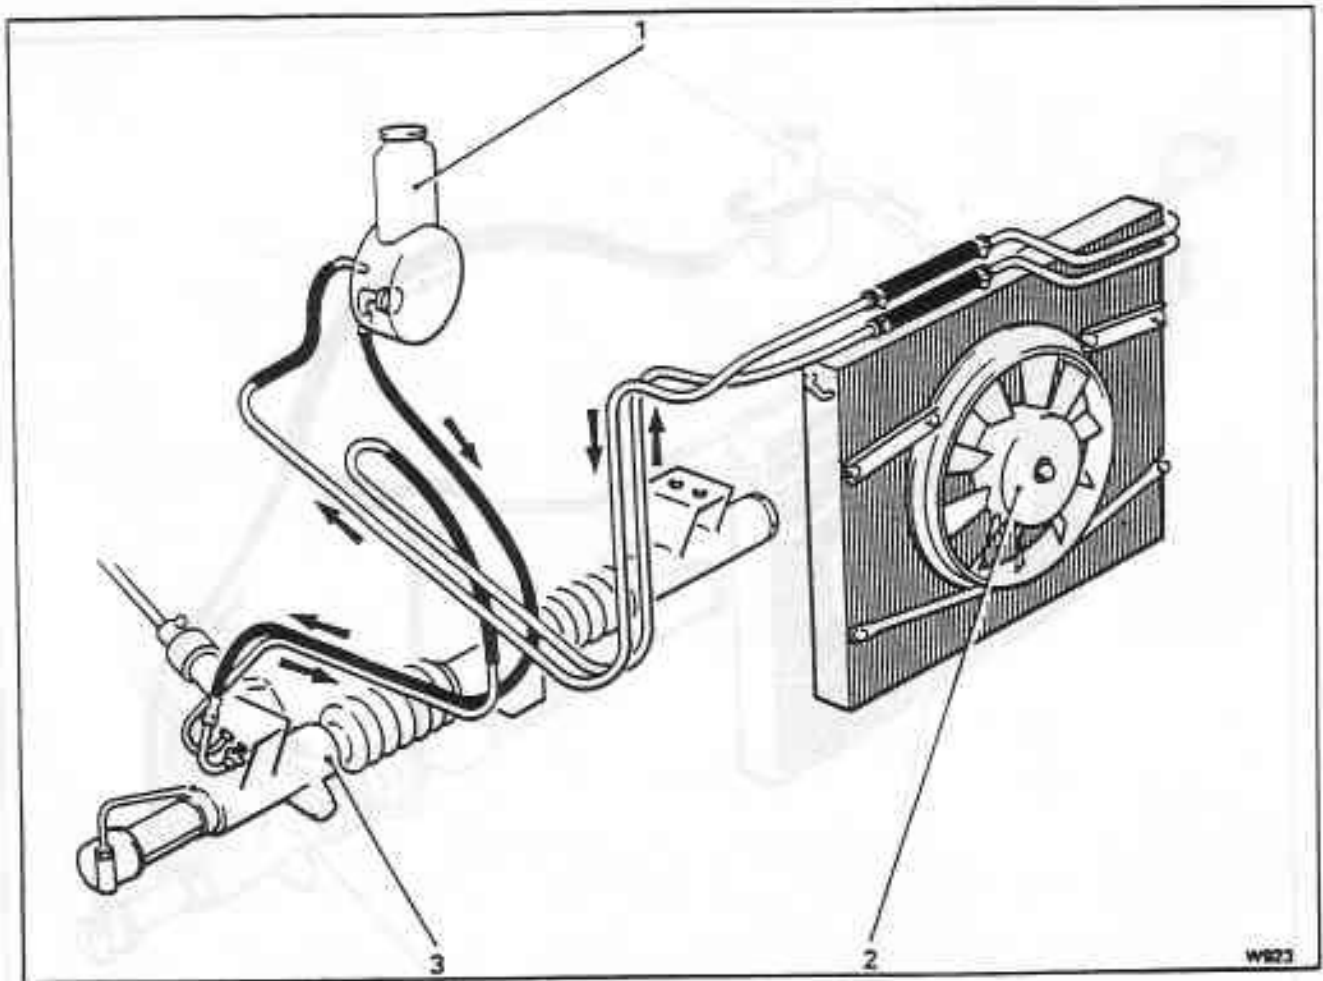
Hydraulic pipe run. Right-hand drive cars
